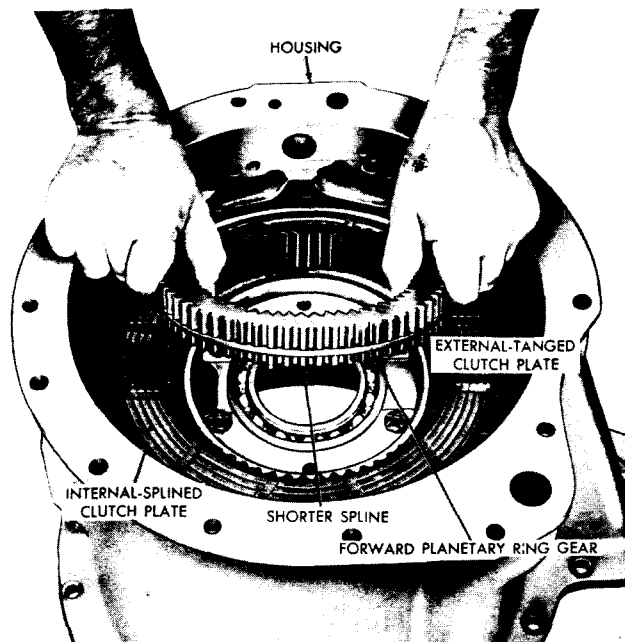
Installing forward planetary ring gear ^{S2447}
